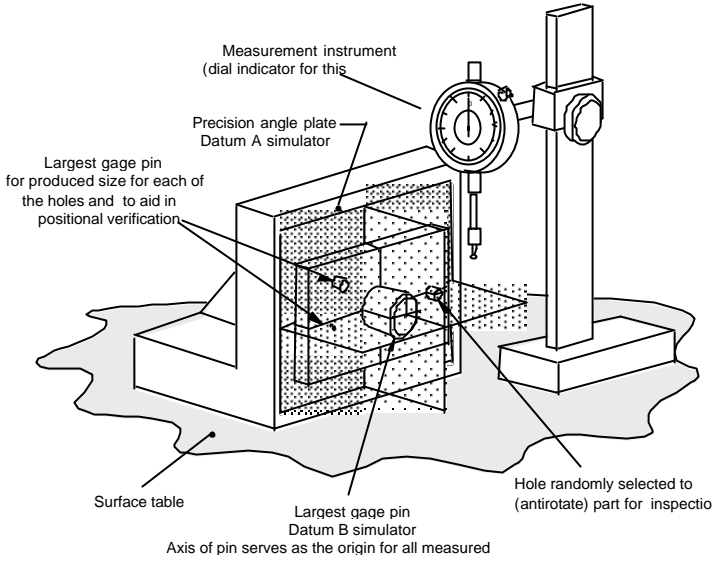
illustrates an example where a datum shift tolerance has been allowed for a geometric tolerance. The three holes and the outside shape are located in relation to the face (primary datum A) and the large diameter hole in the center (secondary datum B at MMC). Let’s see how the datum shift tolerance might be captured by the inspector in this setup.
